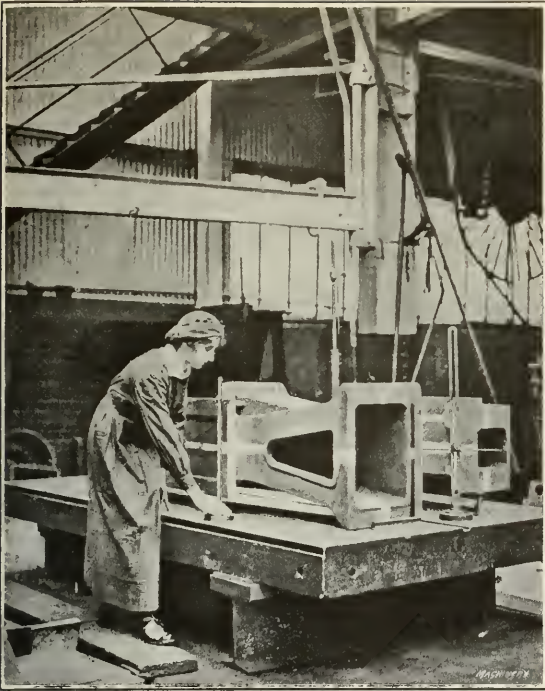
Marking off Columns of Reciprocating Engine with Surface Gage
